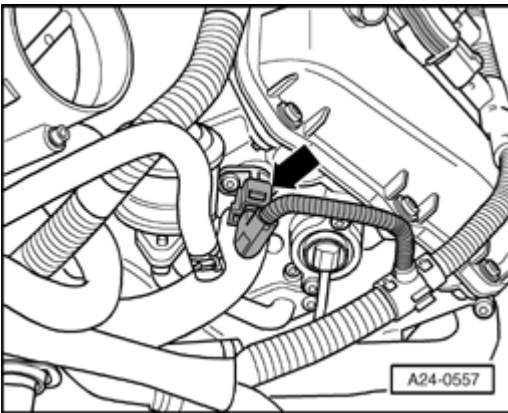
Disconnecting Electrical Harness Connector For Camshaft Position (CMP) Sensor G40 On Right Cylinder Head
